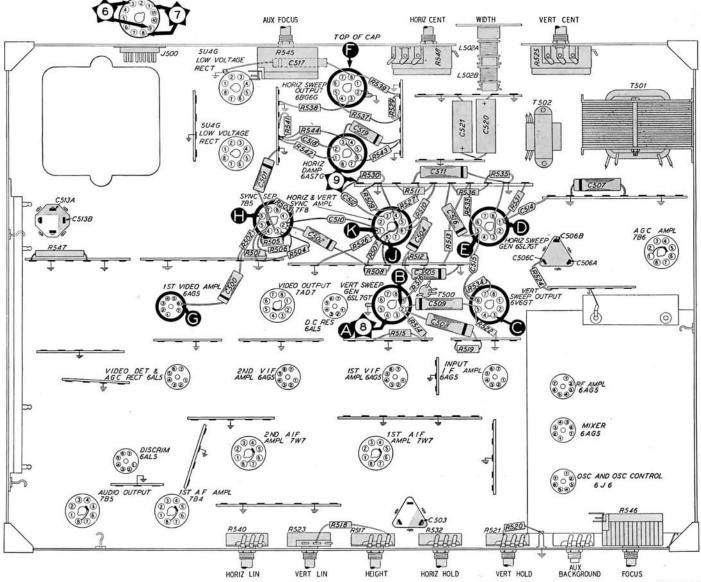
Bottom View of Chassis, Showing Section 5 Test Points
